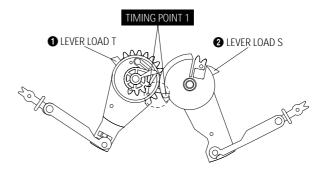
Gear Loading Drive, Slider Cam, Lever T, S Load Ass'y Removal
